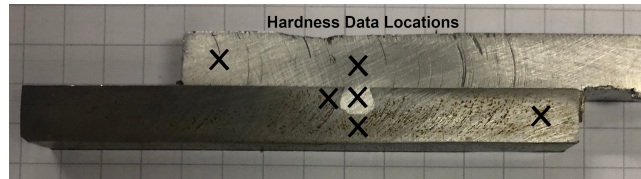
Three Locations in each the aluminum and steel were chosen to represent different heated regions during the weld. In the aluminum, the base material, extruded material, and weld nugget were tested. In the steel, bottom of the dovetail, side of the dovetail, and base material were tested.
